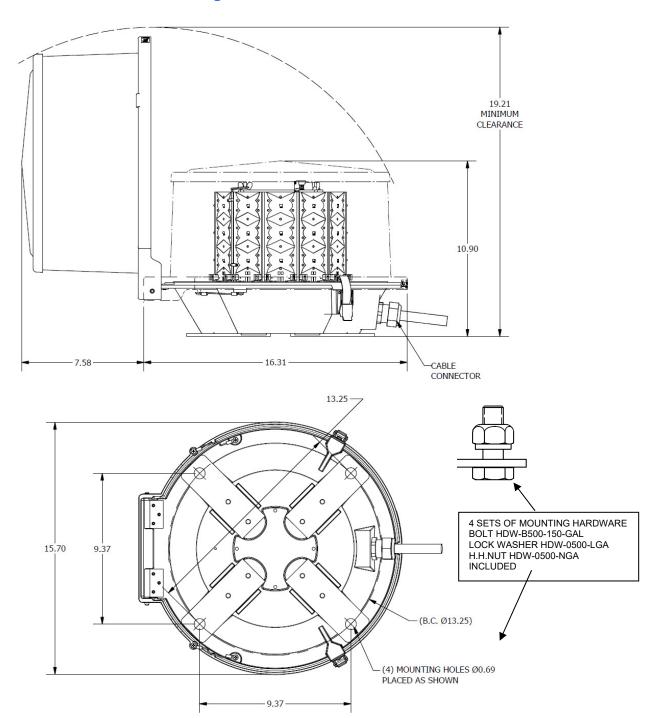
IFH-1700 Flash Head Dimensions and Mounting Detail
